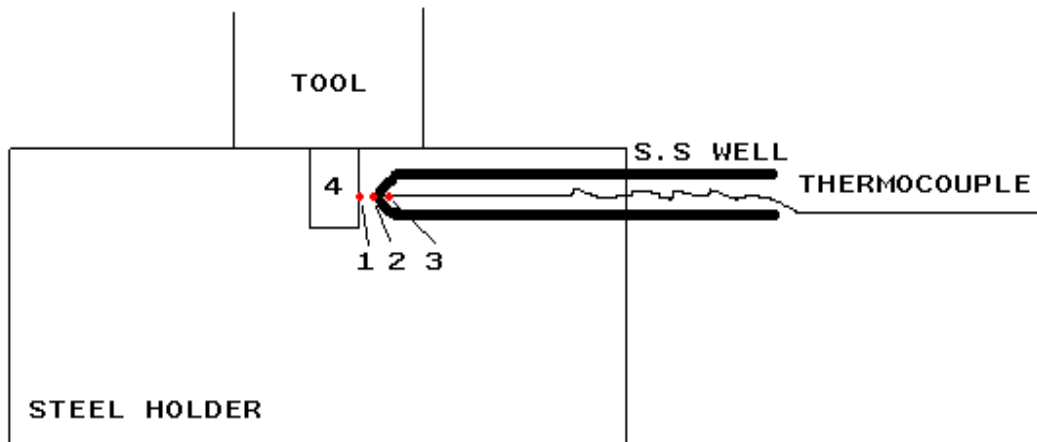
Cross sectional view; Welled thermocouple in the steel Holder
